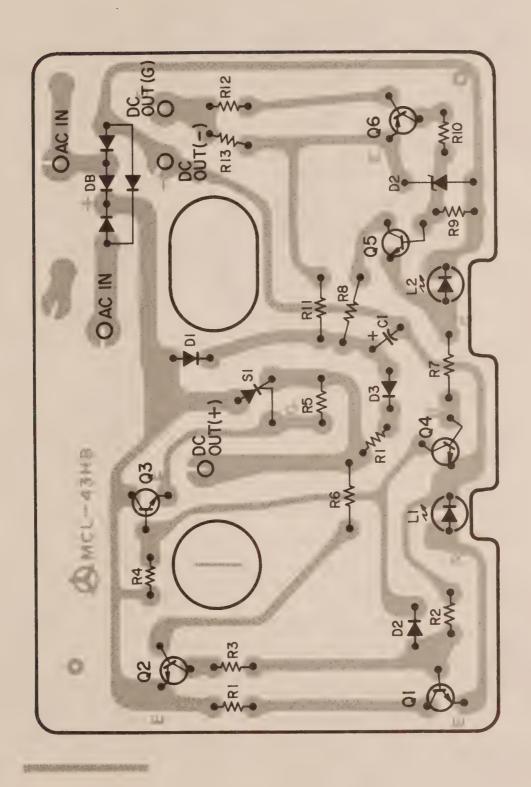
CSA4 SERIES P.C. BOARD LAYOUT (FOIL SIDE WITH COMPONENT OVERLAY)
